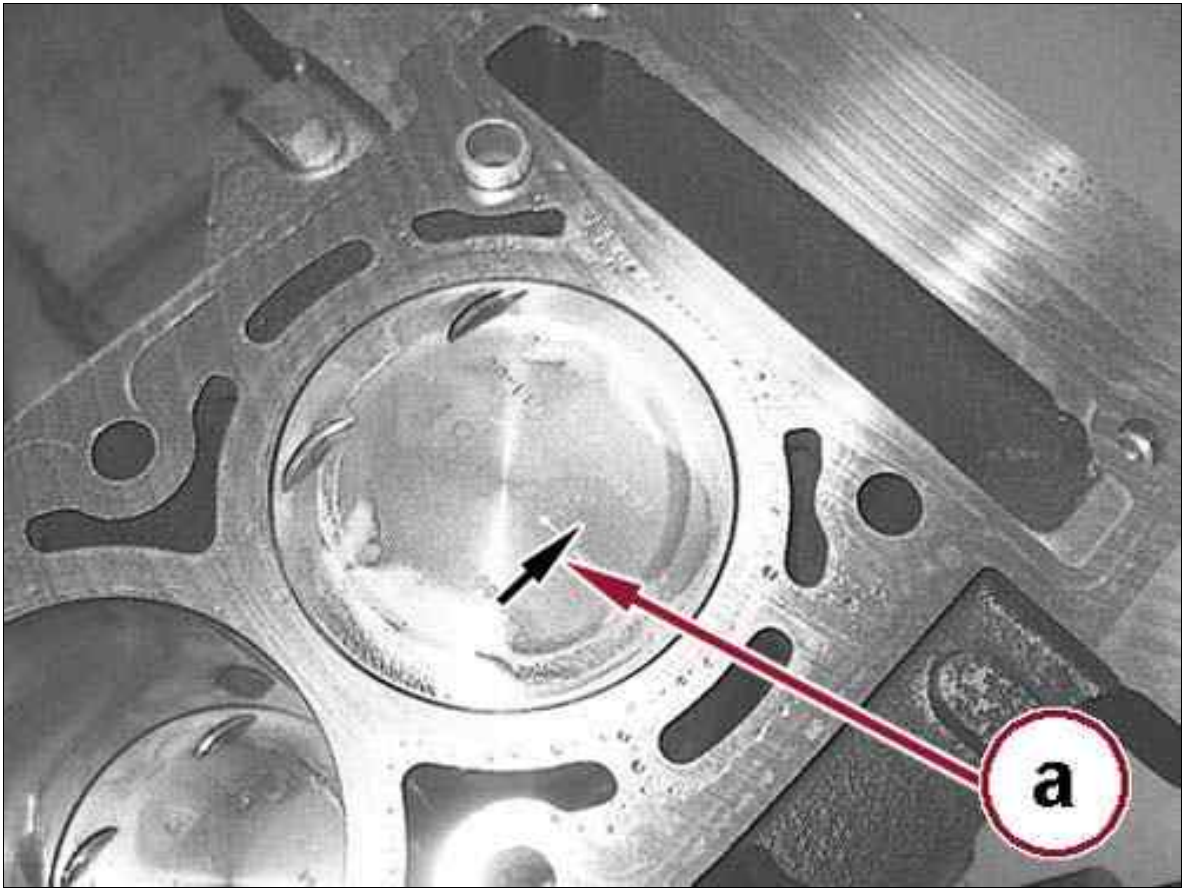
Compressing Sealing Rings To Install Piston Assemblies
